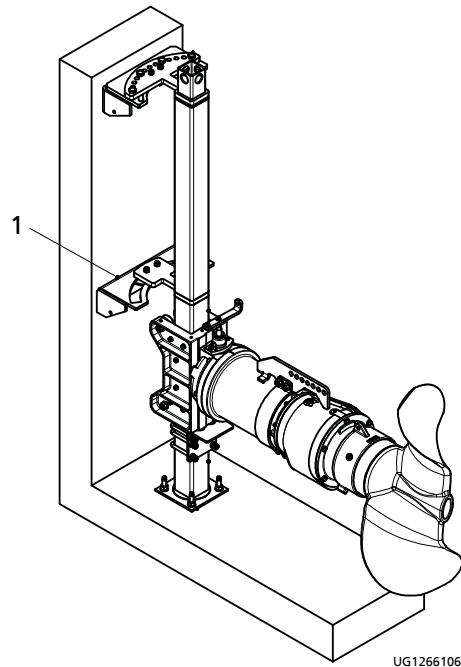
Installation example: Amaprop, size 1002, mounted on tank edge and horizontal tank floor
